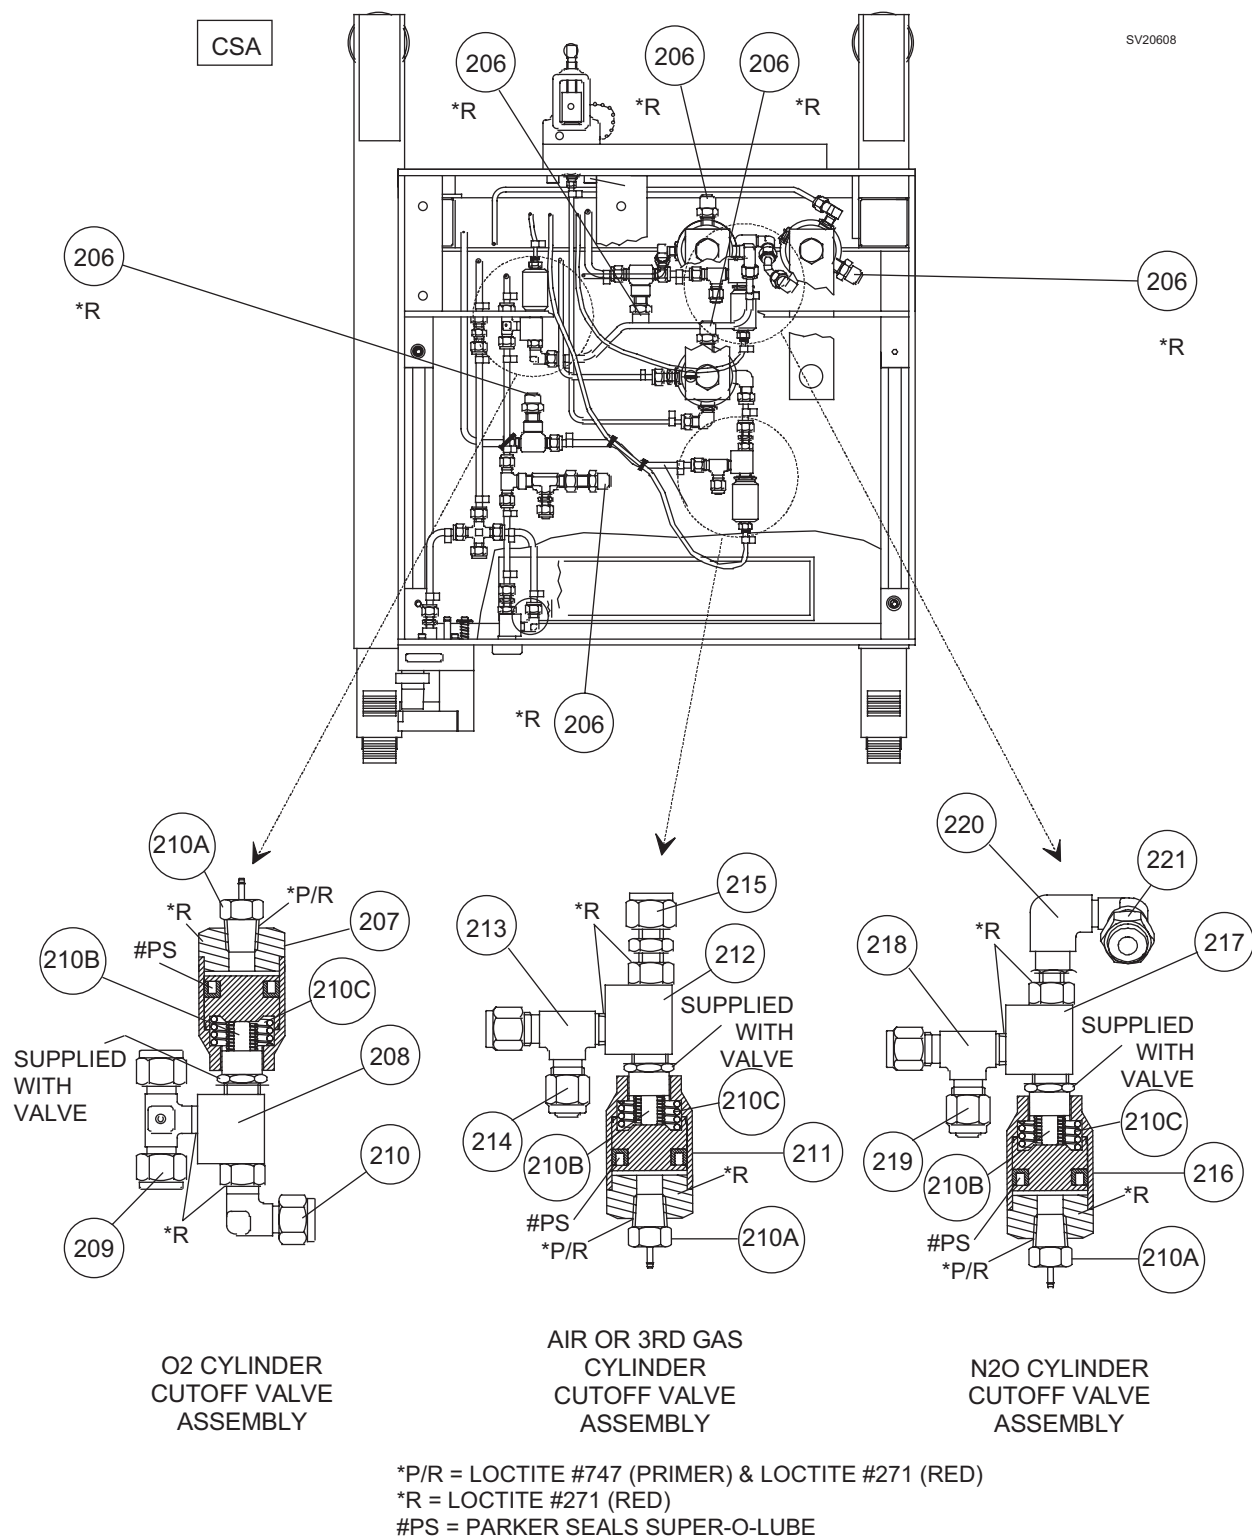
CSA Items: Relief Valve and Cylinder Cutoff Valves
